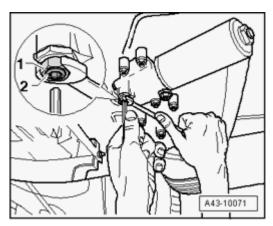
Loosening Lock Nut On Line To Be Checked & Screwing In Shut-Off Screw Until It Is Hand Tight
